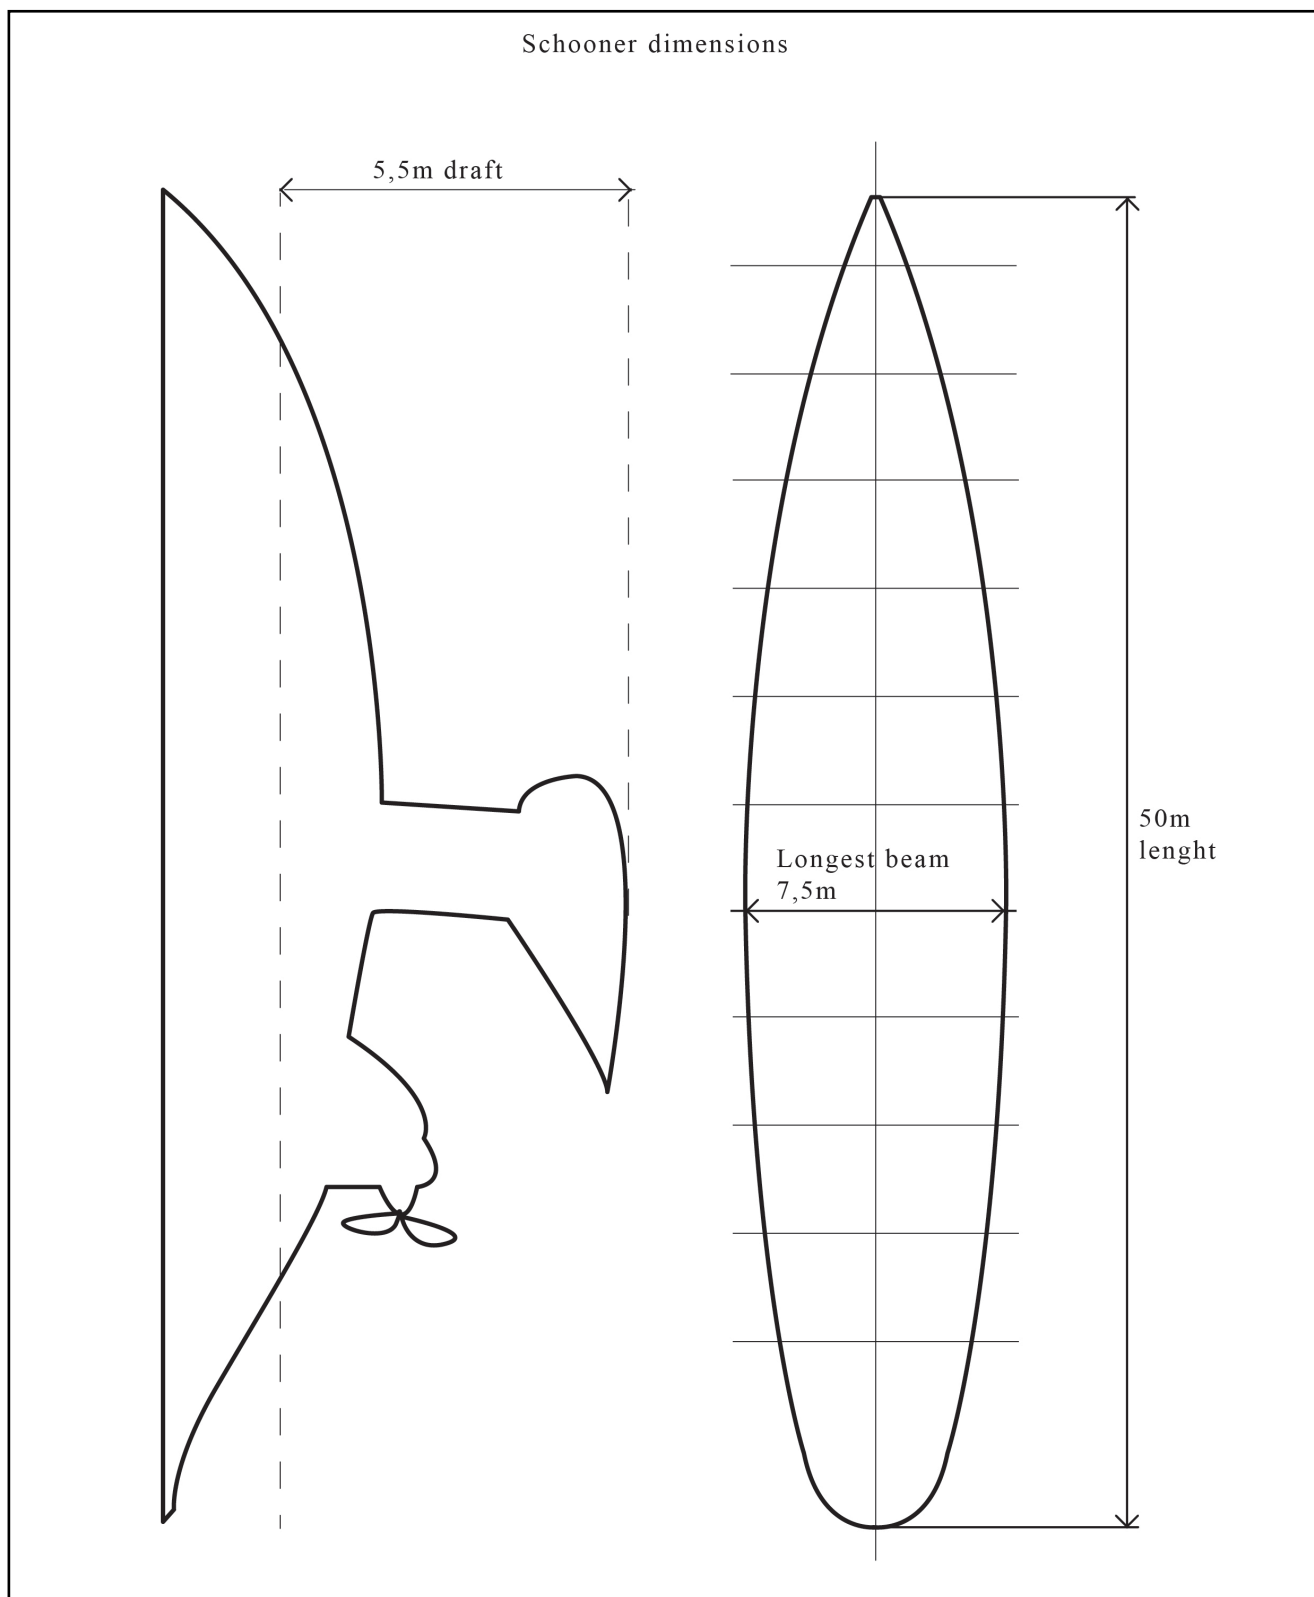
Basic Dimensions of the schooner, side view. Picture by the author.
